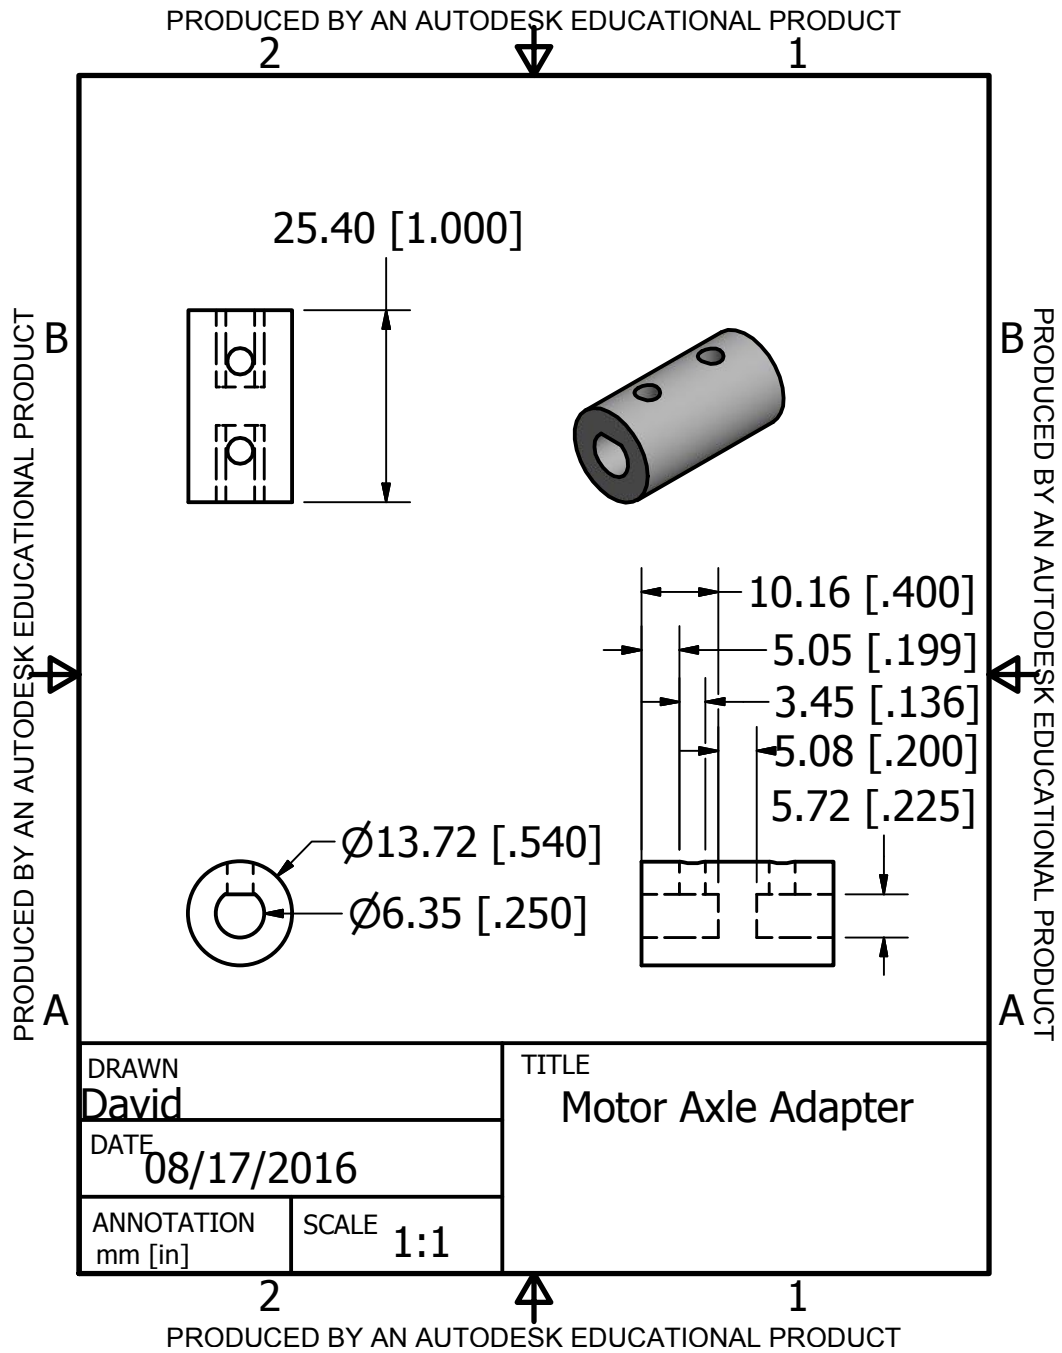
Mechanical drawing for the electronics wheel motor-axle adapter. This piece is screwed onto the motor's rotor and the assembly's axle using two 8-32 set screws.
